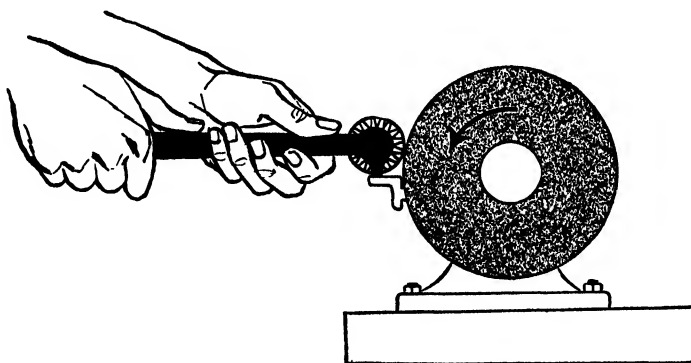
Dressing a grinding wheel. The cutting surface of the wheel is easily and quickly trued, cleaned, and renewed by simply holding the dressing tool firmly against the wheel while it is turning.
